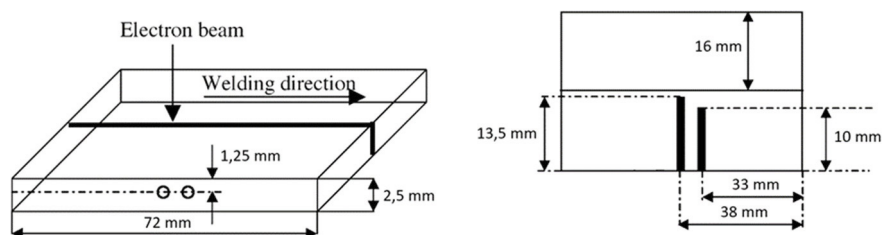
(a) side view and (b) top view of the specimen. Holes for the thermocouples could be noted in both schemes.
